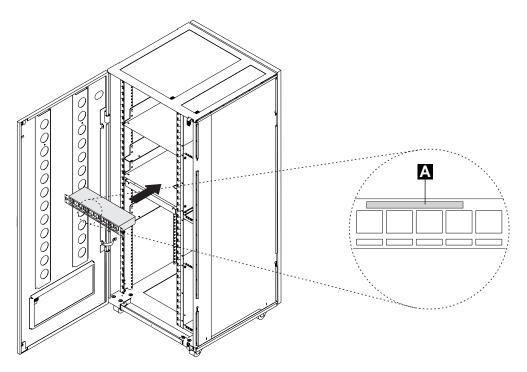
Installing the 8228 (Controller Expansion Rear side)
